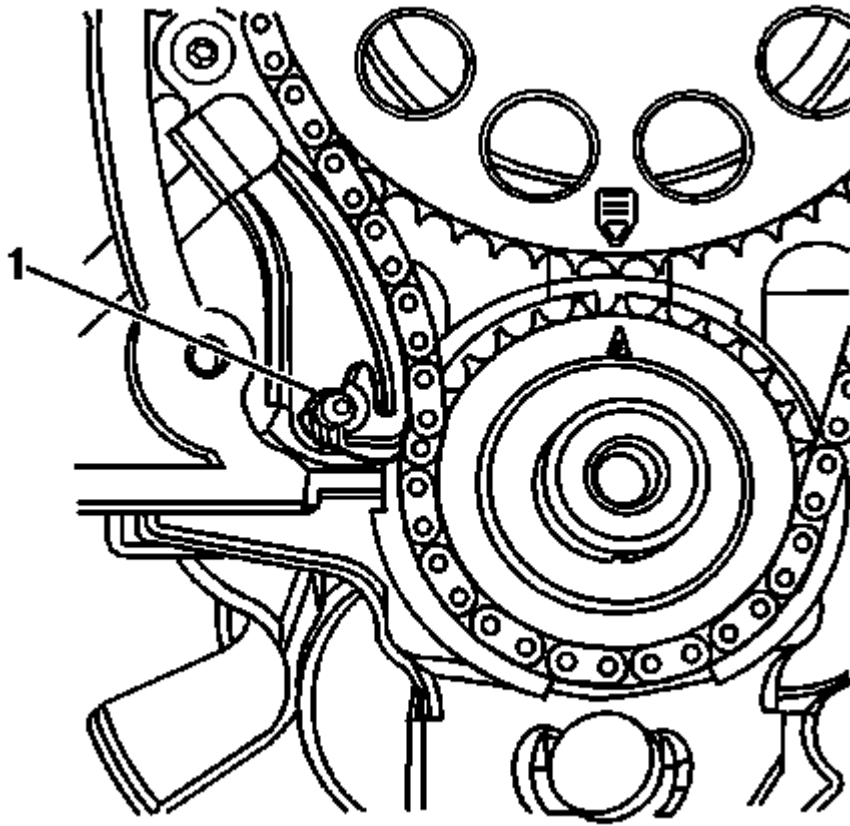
View Of Timing Chain Tensioner Shoe & Pin
